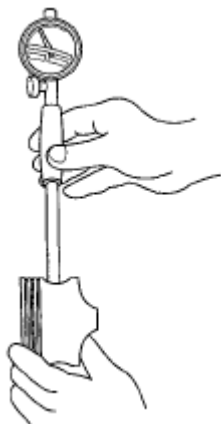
Checking Difference Between Piston Pin Diameter And Piston Pin Hole Diameter On Piston
